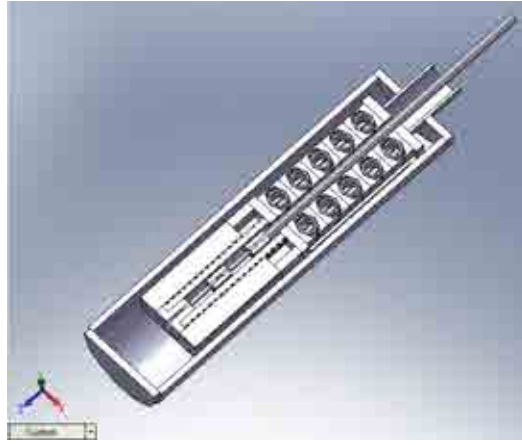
Tensile specimens and compressed rings in the loading grip.
